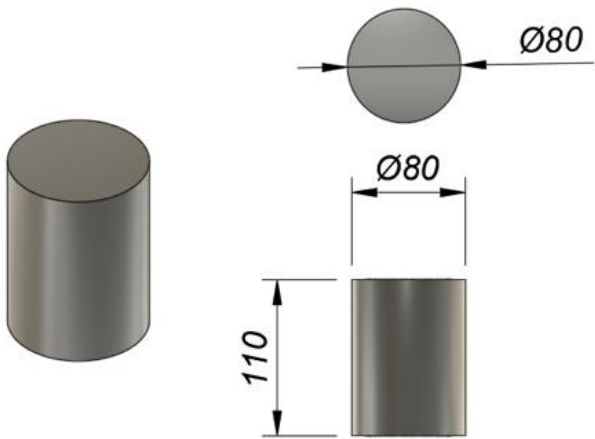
Surface-mounted finite circular cylinder model with dimension (mm)
